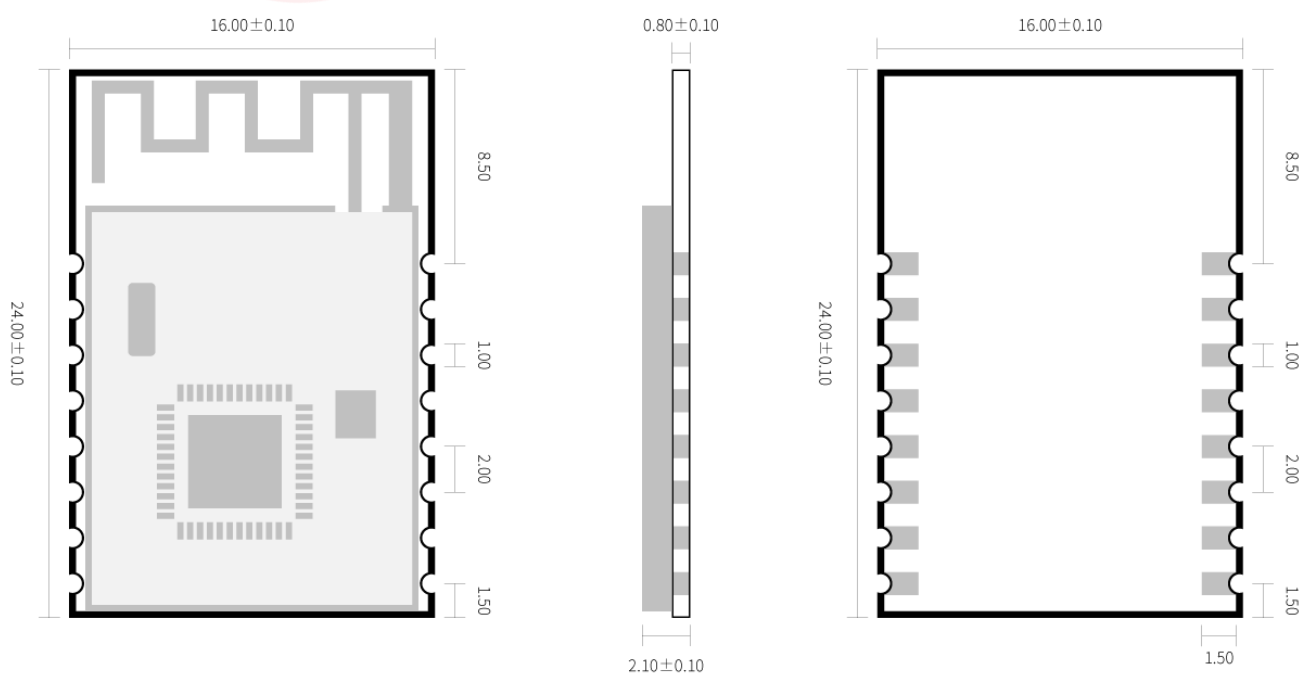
Recommended PCB Footprint of RF-BM-2652P3
